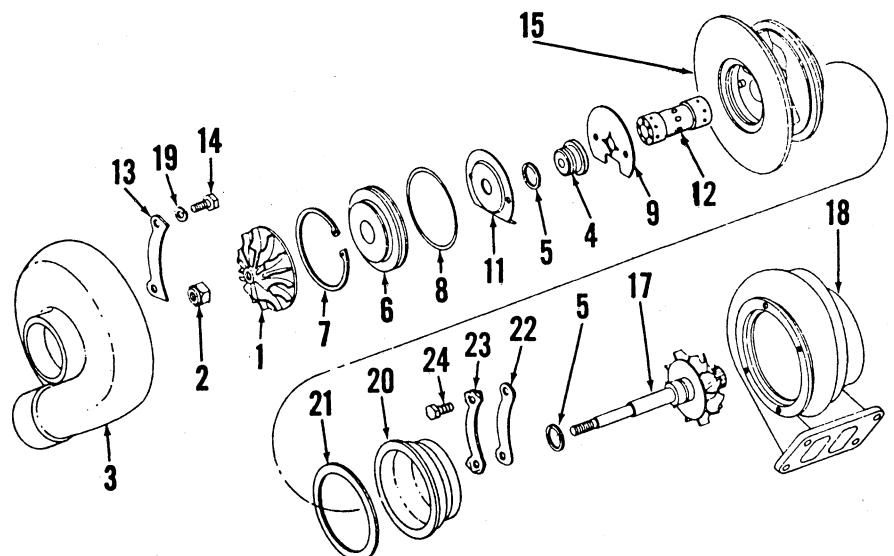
Exploded view of Schwitzer Model 3LM turbocharger.
